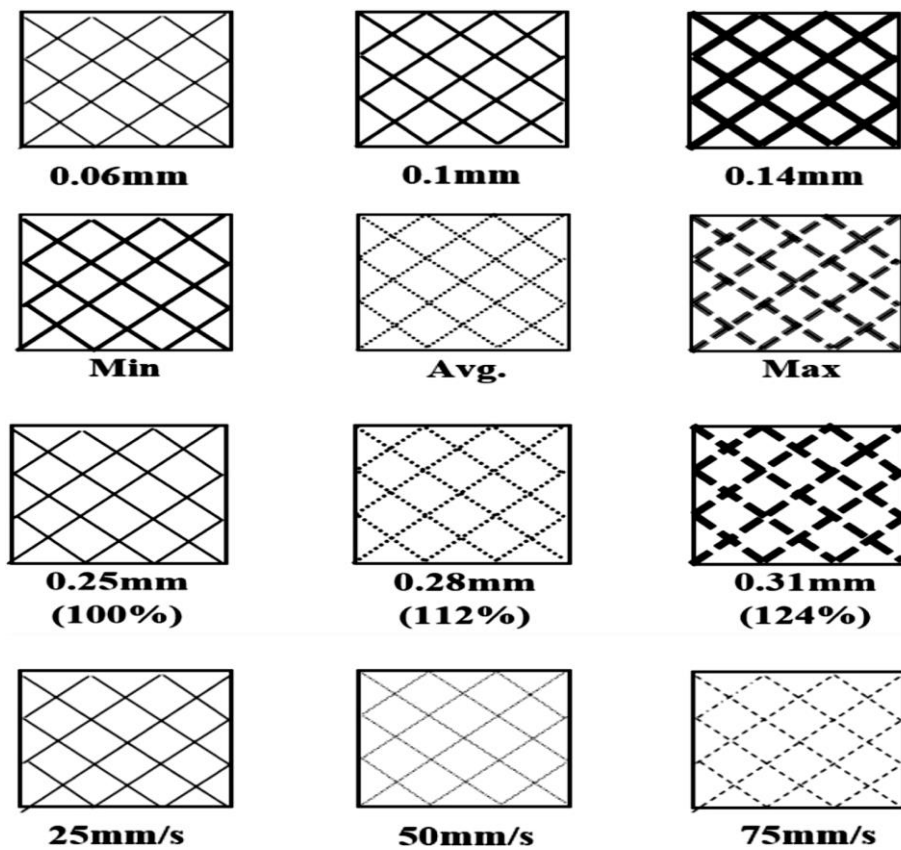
Printing speed and Quality of specimen &. FDM printing parameters (a) Layer thickness (b) Nozzle temperature (c) Line width (d) Printing speed [7].
